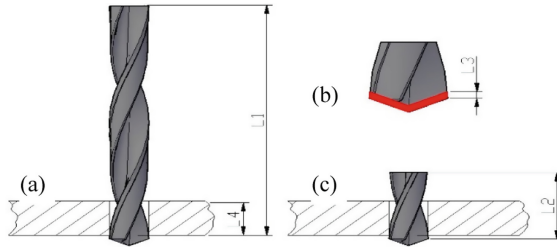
The main dimensions (lengths) of the drill. (a) the new drill, (b) the length of the drill removed when re-sharpening (c) the drill at its end of tool-life
